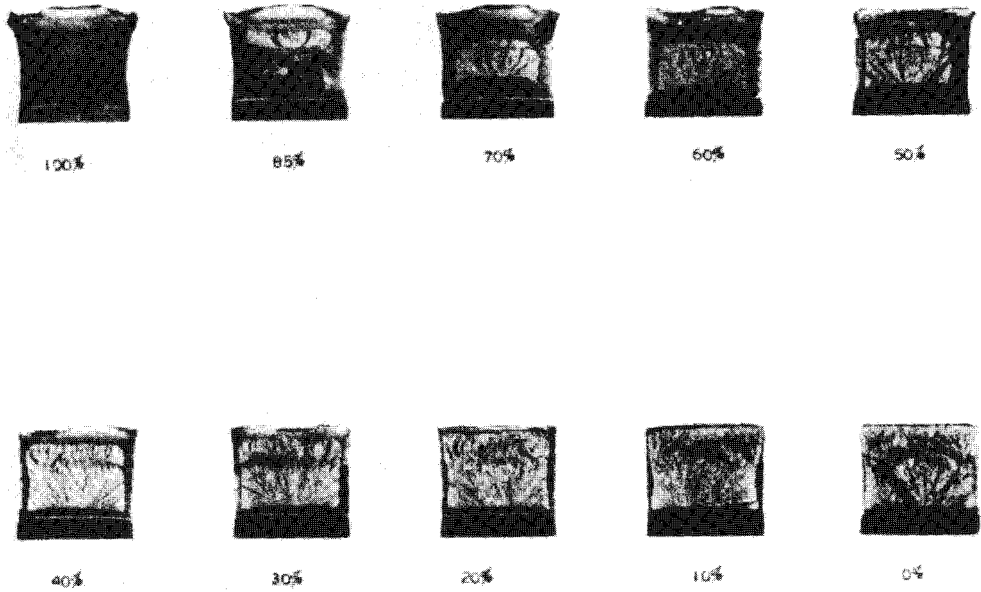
FRACTURE APPEARANCE CHARTS AND PERCENT SHEAR FRACTURE COMPARATOR
